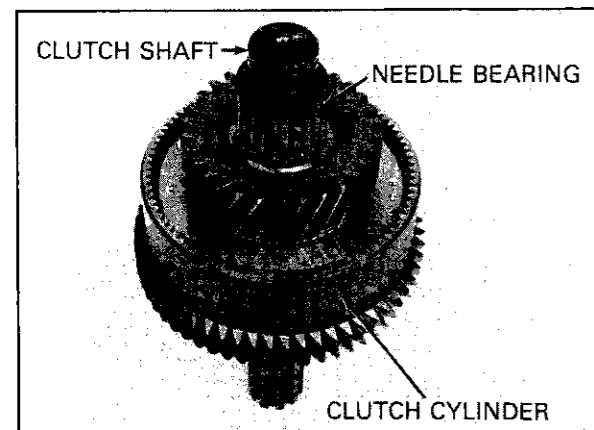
NEEDLE BEARINGS AND SPACER INSTALLATION
